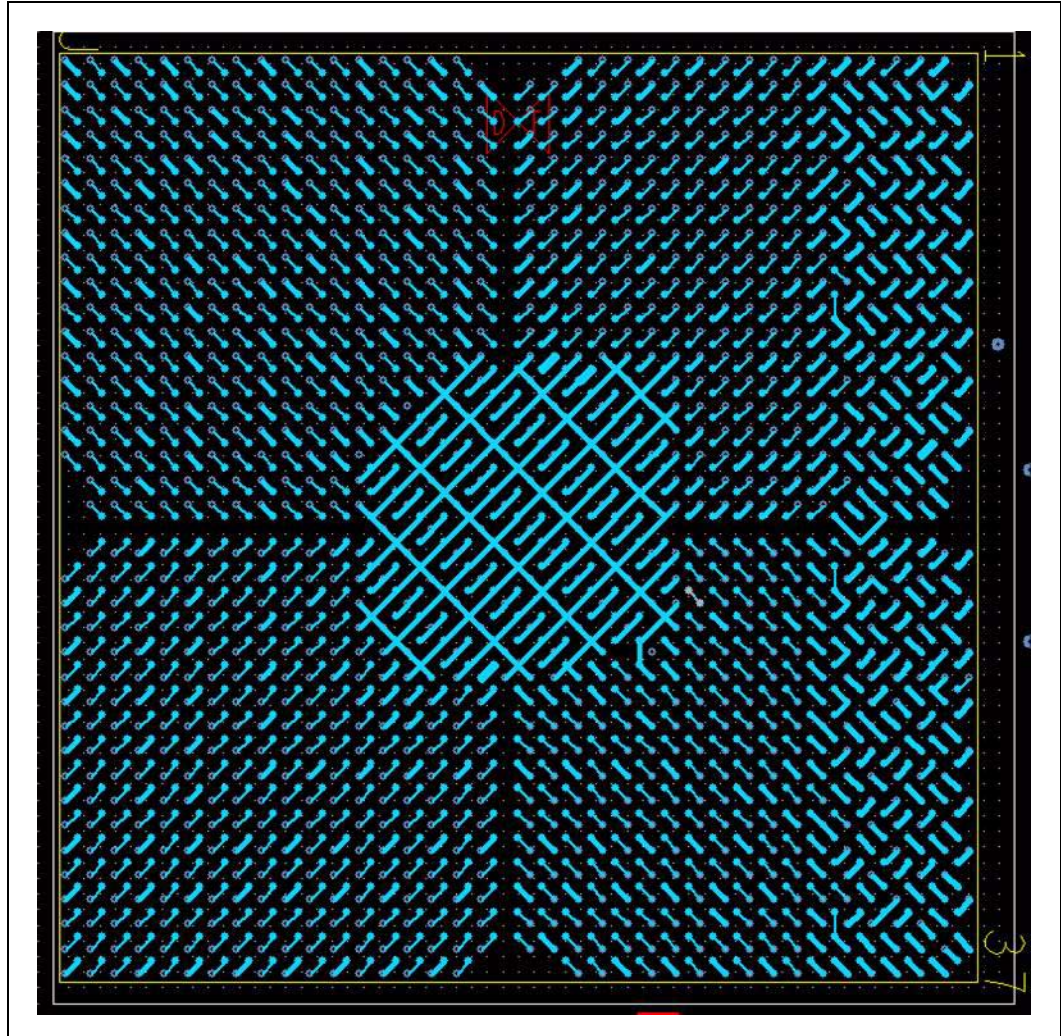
illustrates the IXP28XX network processor Rambus* controller footprint and via placement, showing an exploded view of checkerboard detail.
